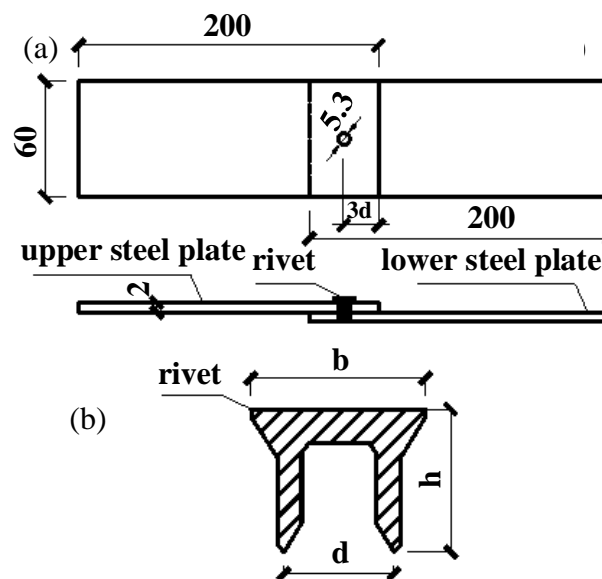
Dimensions of shear specimens: a) connected sheets, b) cross-section of SPR
